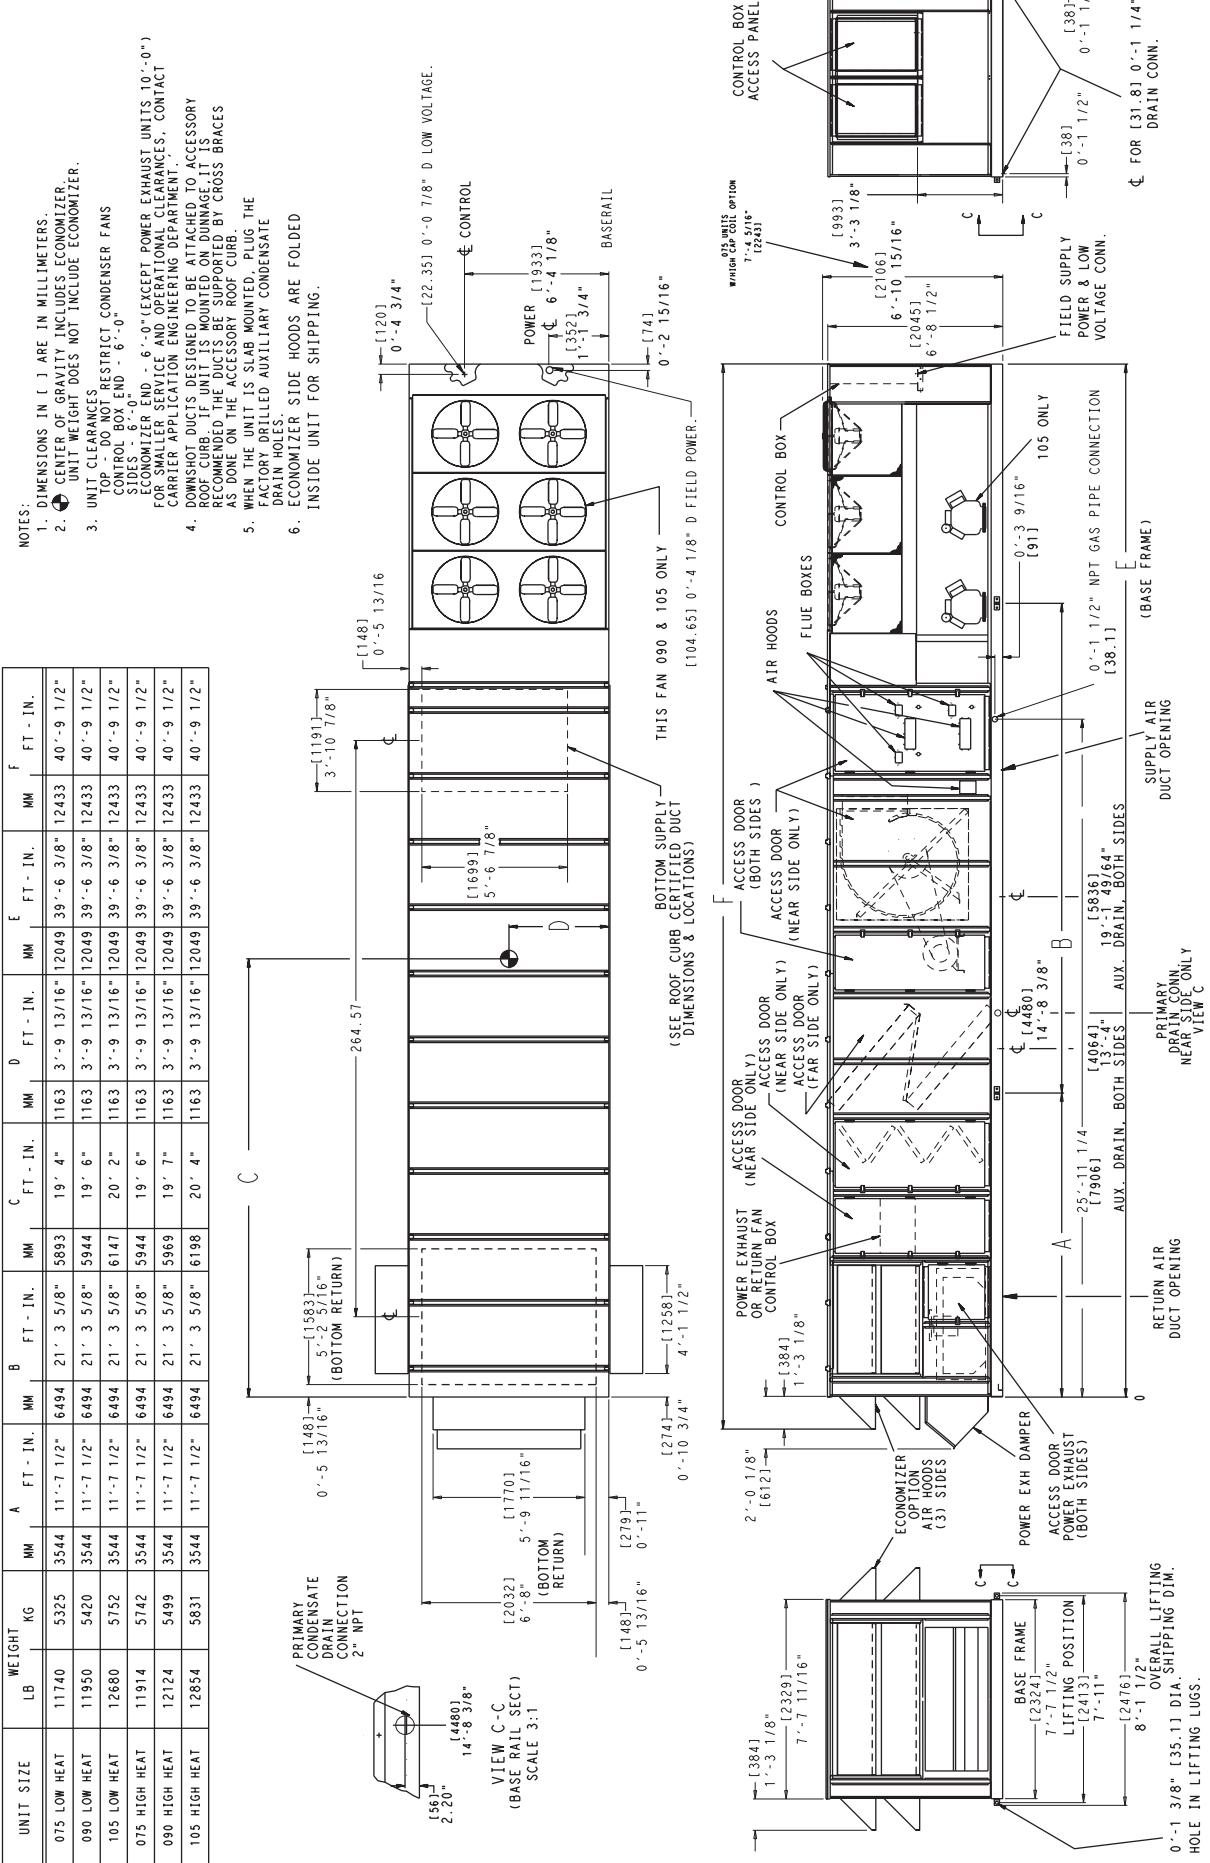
Base Unit Dimensional Drawing — 48Z6,Z8075-105 (Units with Return/Exhaust Fan)
